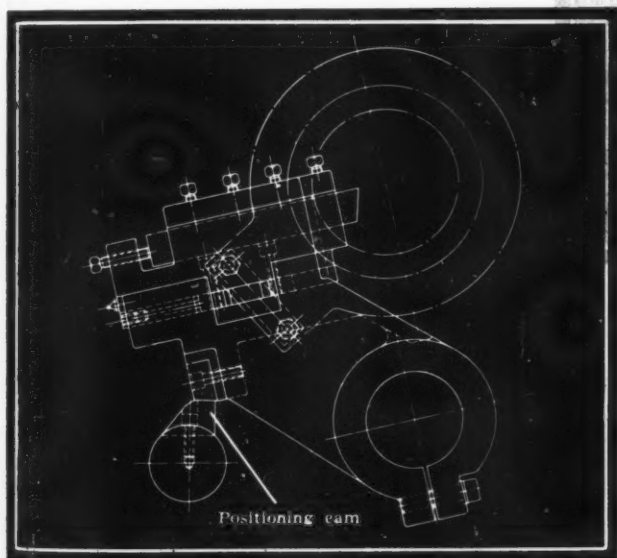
Main tool carriage supporting bar is located on the right. Positioning cam is fastened to oscillating bar
